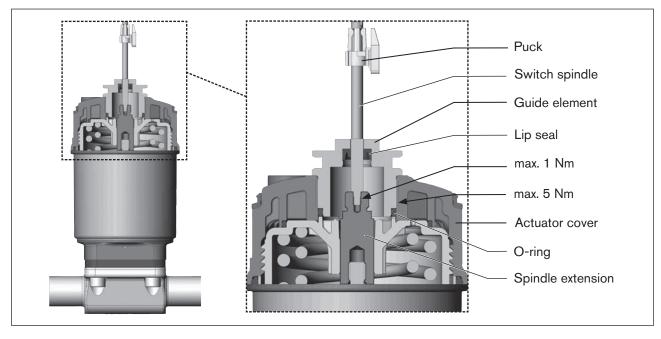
Attaching the switch spindle for process valves Types 2103, 2300 and 2301
